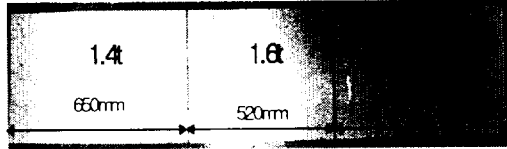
Blank for tailor tube welded for Nd:YAG leisure.
